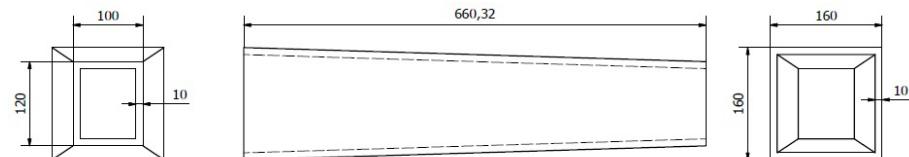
Primary Diffuser (Section 7). Dimensions in millimeters. By the authors.
